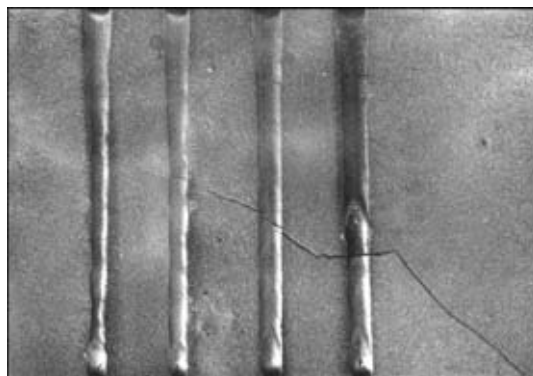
Cold cracks in a welded sample of alloy 47XD made by EBW without preheating
